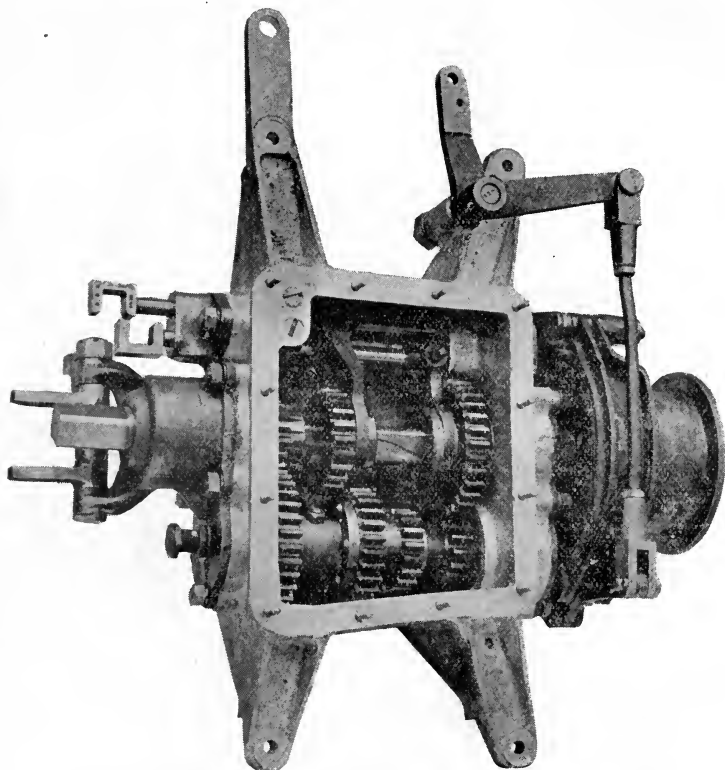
DIRECT DRIVE GEAR BOX, REVERSE WHEELS IN MESH.
